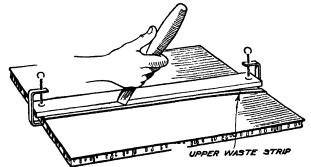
Making a Joint in Veneer. The chisel cuts through both thicknesses.
